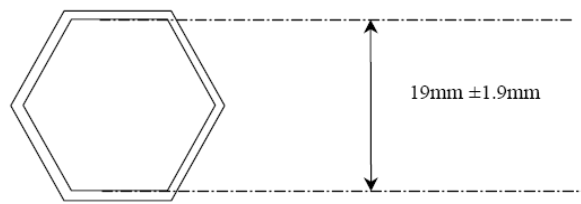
Dimension of Aluminium Honeycomb Cells (Top View)
